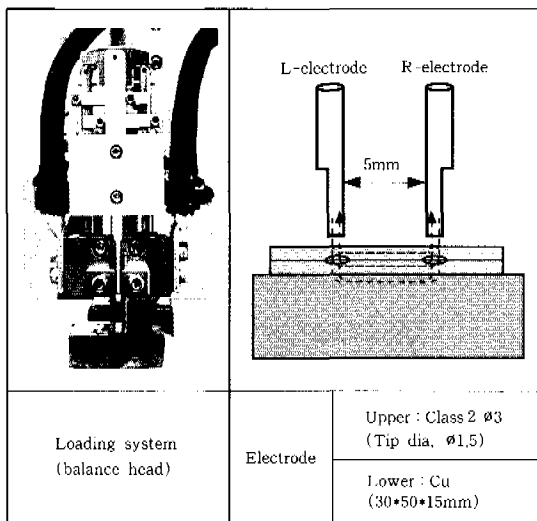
Appearance of balance head and schematic diagram of electrode for series welding
